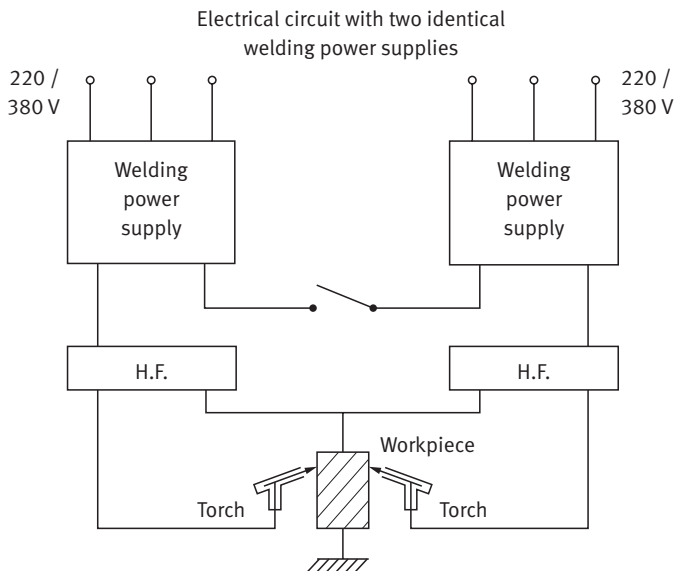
Principle of simultaneous two-operator TIG welding – Two operators weld in one pool on both sides at the same time
